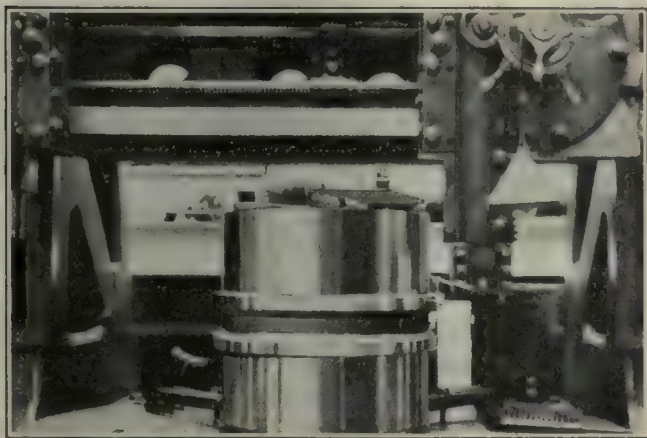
LARGE CRANK BRASSES ON VERTICAL BORING MACHINE WITH INDICATOR APPLIED
